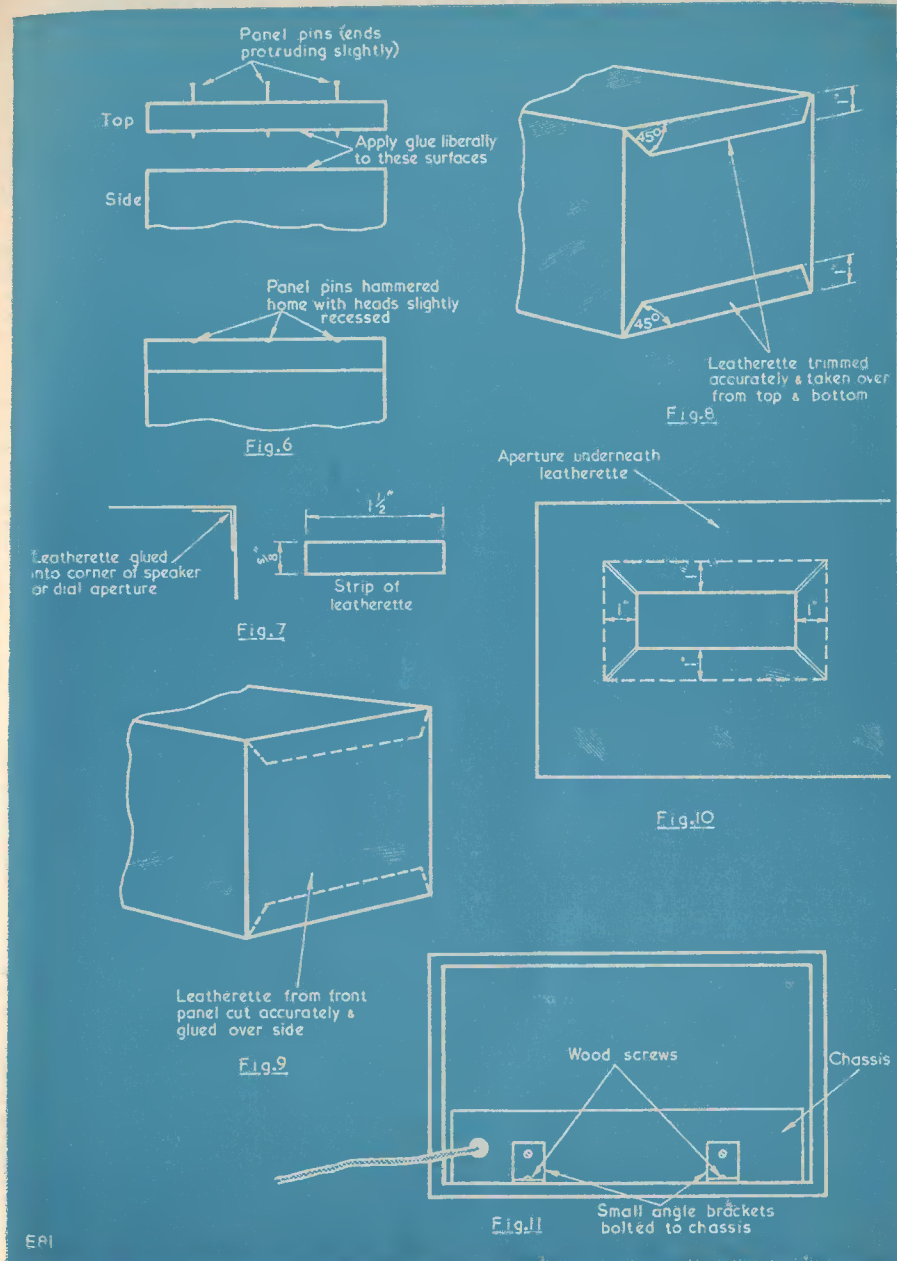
Showing how the panel pins assist in the location and assembly of the butt joints. Fig. 7. Applying small strips of leatherette to the corners of the speaker and dial apertures. Fig. 8. First step in covering the sides of the cabinet. Fig. 9. Finishing off the covering of the sides. Fig. 10. Cutting the leatherette at the dial aperture. A similar procedure is required for the speaker aperture. Fig. 11. Showing the simple method of mounting the chassis
